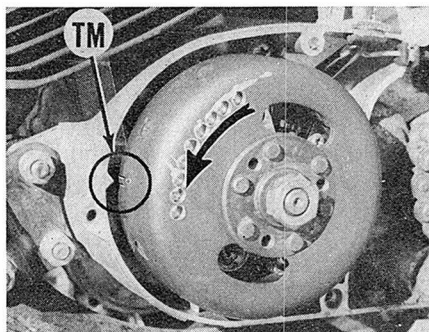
Ignition timing marks (TM) on crankcase and flywheel are shown. Ignition timing can be retarded 2 degrees, but should not occur before crankcase mark and flywheel mark are aligned.
